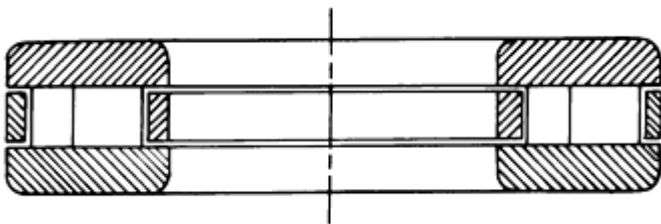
Thrust cylindrical roller bearing limited to use with axial loads only due to its 90° contact angle
